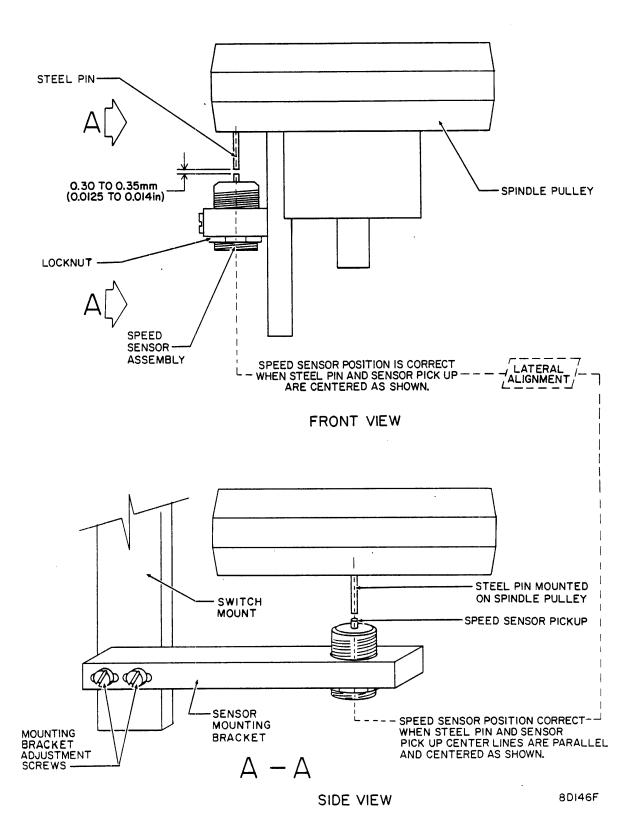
Speed Sensor Assembly Adjustment (S/C 08 and Below)
